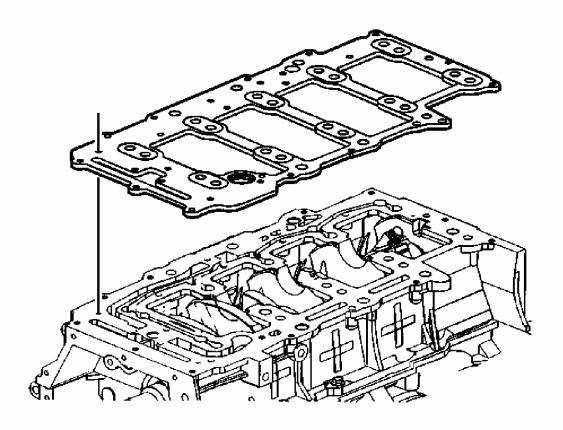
View Of Oil Manifold Plate Courtesy of GENERAL MOTORS CORP.
